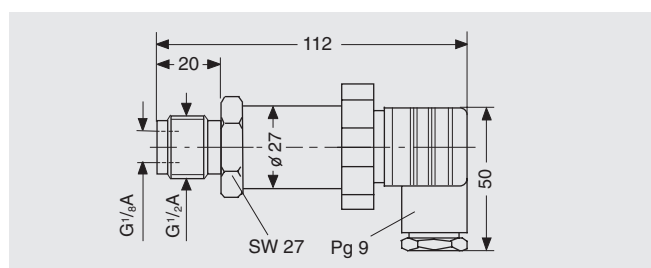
/165 Pressure transmitter 7MF1562, dimensions
